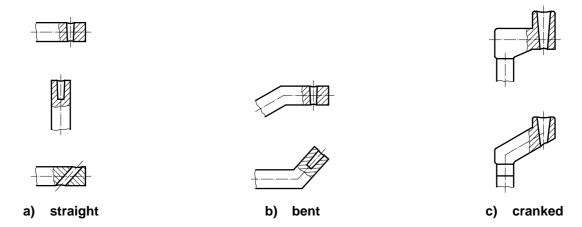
Electrode holders with female taper for spot welding electrodes (fluid cooling is not illustrated)
